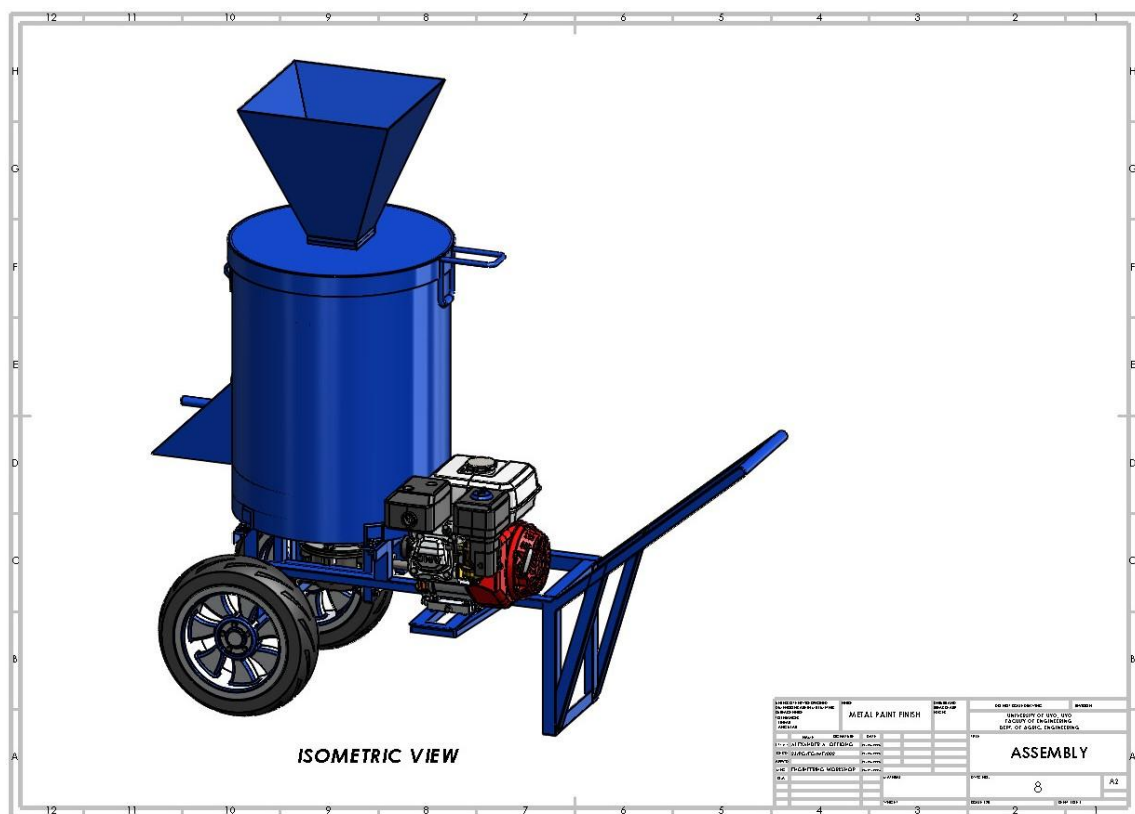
Three dimensional coloured model drawing of the vertical palm fruit digestion machine by Reseracher (2025)
